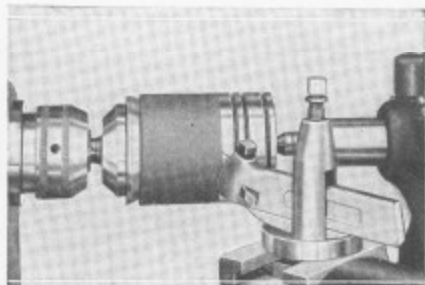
Finishing a Semi-Machined Piston to fit a Rebores Cylinder.
